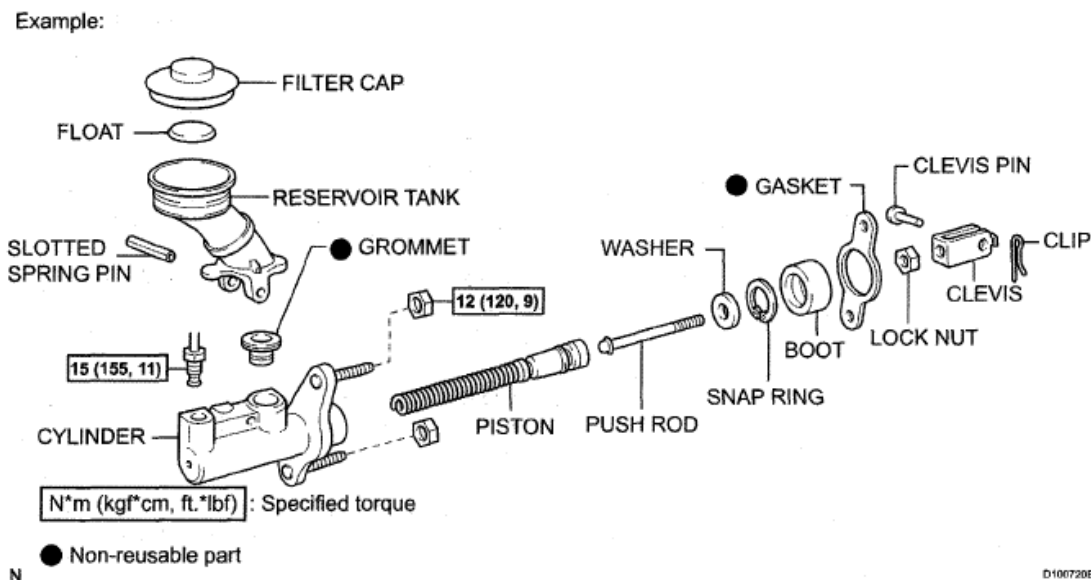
Exploded View Of Master Cylinder With Torque Specifications
